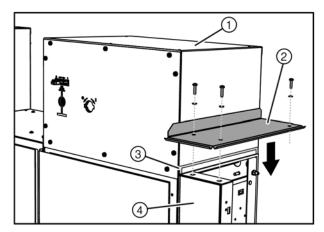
Example: Fastening a protection plate for end panels with make-proof earthing switch (basic scheme)
